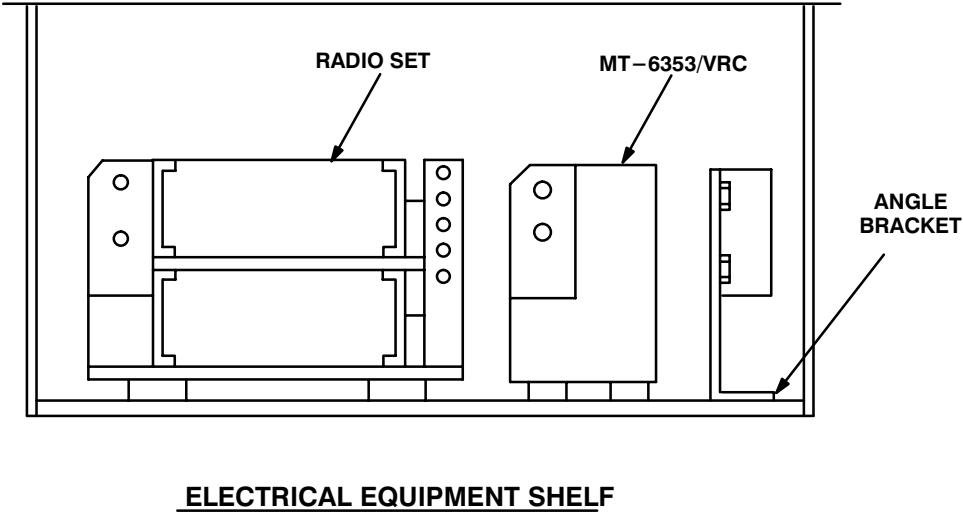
(2). MK and Radio Installation: Radio Equipment Locations
